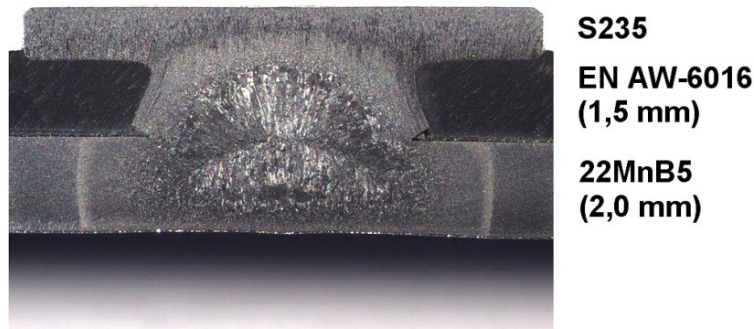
Example of an aluminium-steel weld ^[8]
